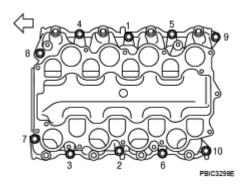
Identifying Intake Manifold (Lower) Mounting Bolts Tightening Sequence
